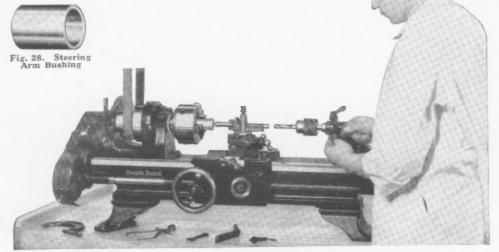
Making a Replacement Bushing on a 9-inch Junior South Bend Lathe
